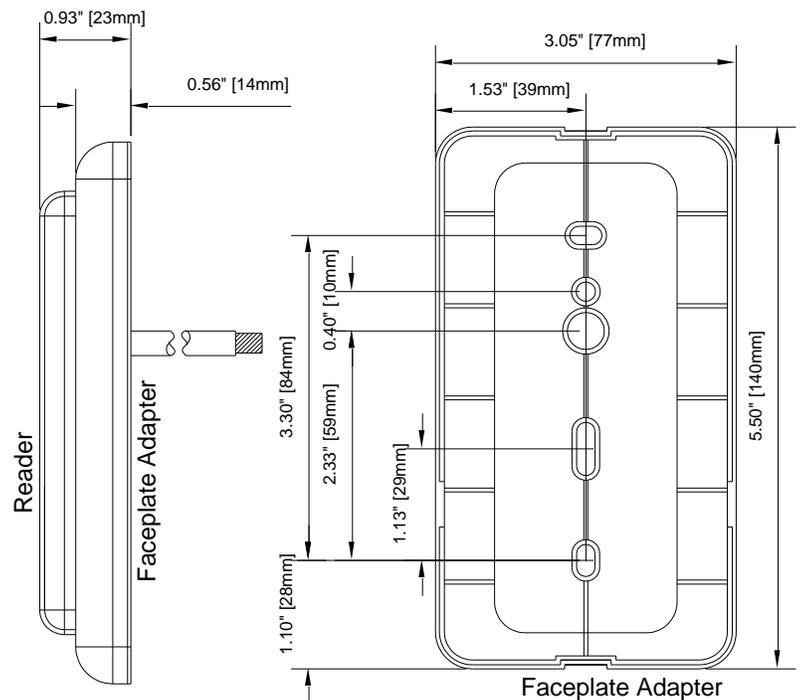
CV-7500P Reader mounting with faceplate adapter
